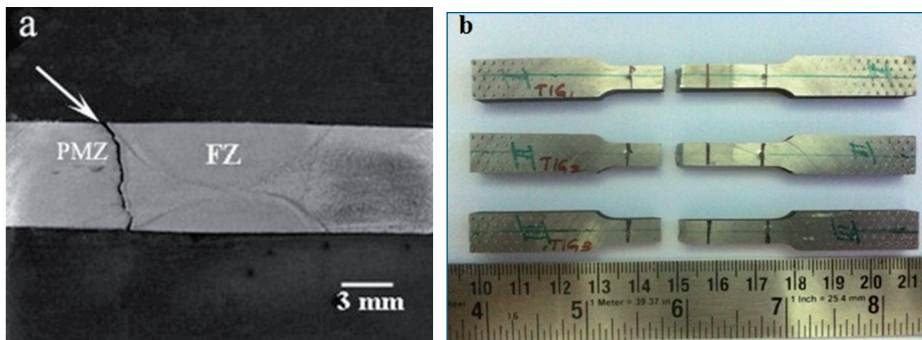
Tensile-tested GTA welds: (a) cross section of a fracture surface, (b) failed specimens (arrow shows failure location)
